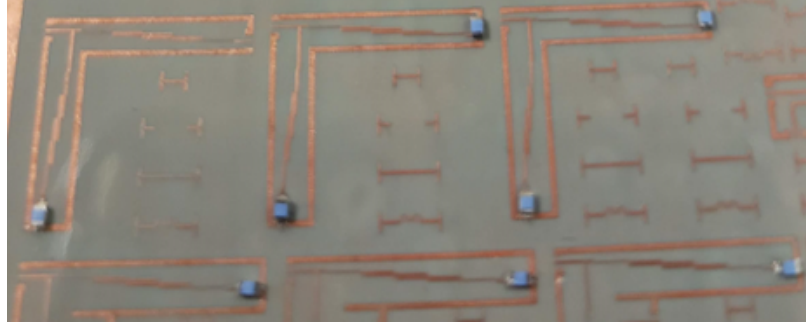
0402 (1005 metric) footprint resistors soldered onto diplexer coupons.
